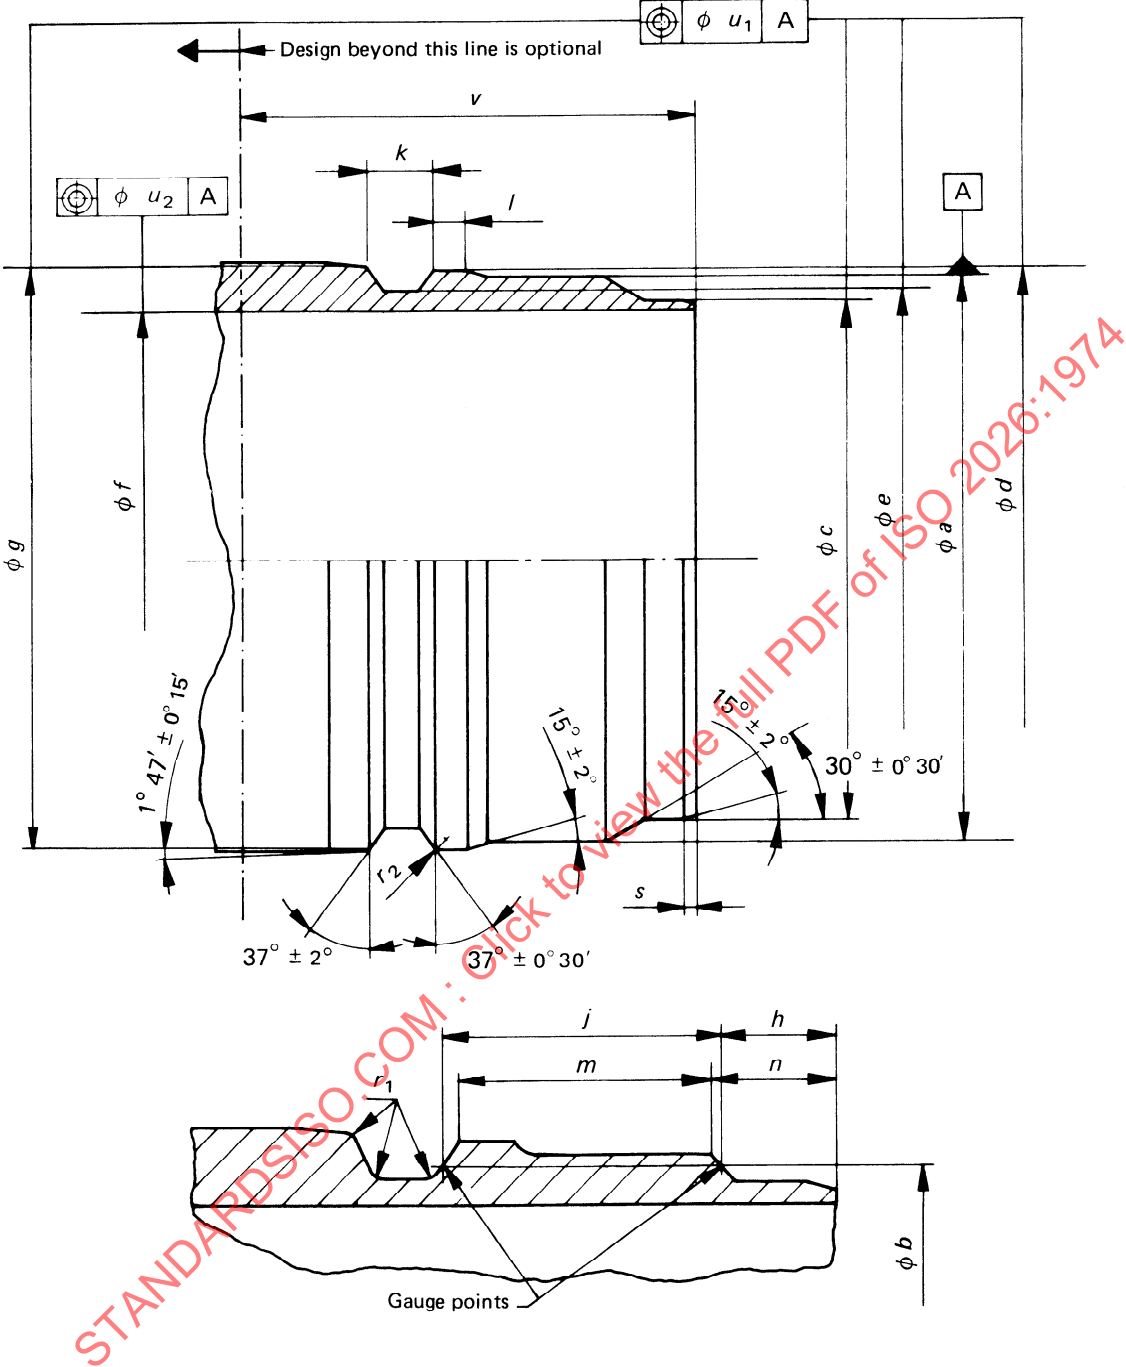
Basic dimensions and tolerances of connection
